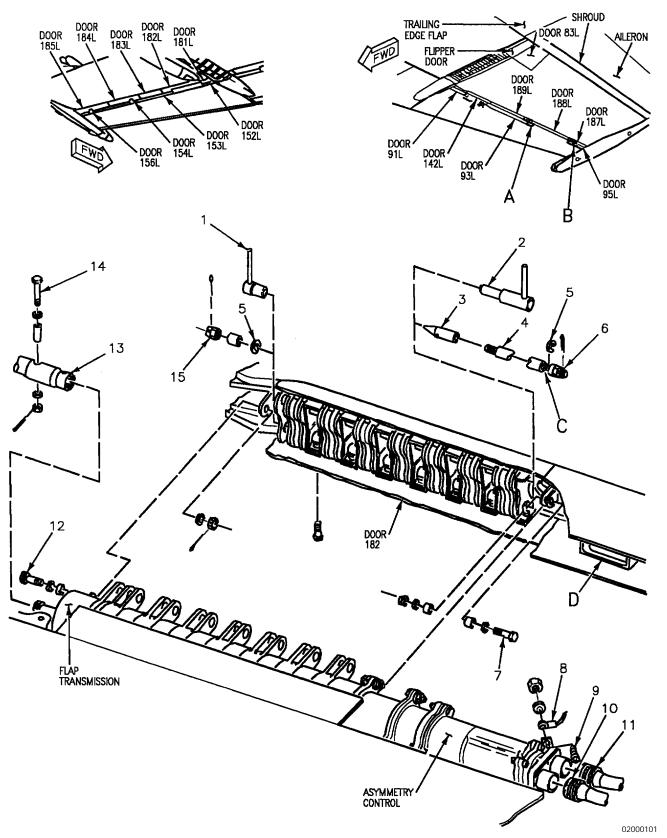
Outer Wing Leading Edge Flap (Sheet 1)
